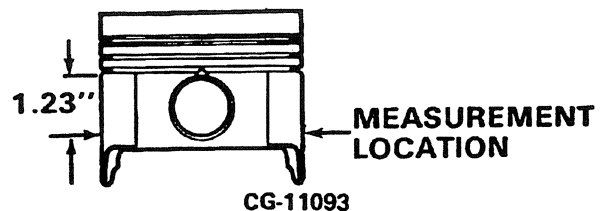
Piston Skirt Dia. Measurement (90° to pin bore)
